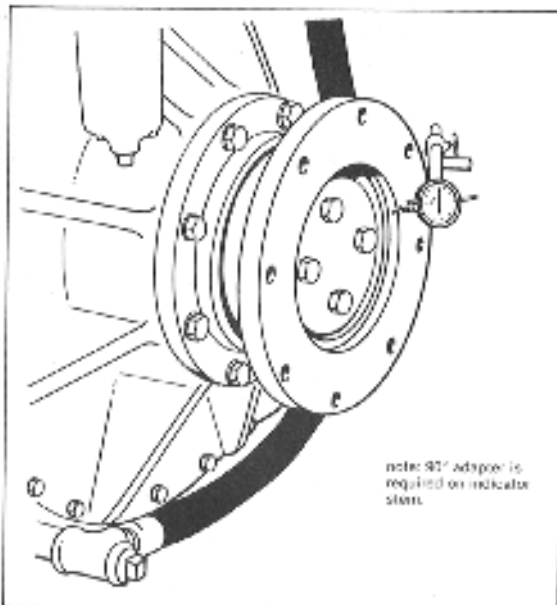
Dial Indicating Output Flange Pilot Ring Groove
